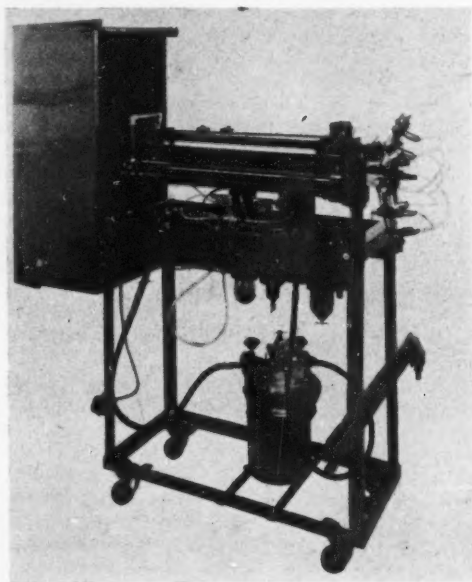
Holt & Mosedale Spray Lubricating Equipment for Forging and Drawing Dies
